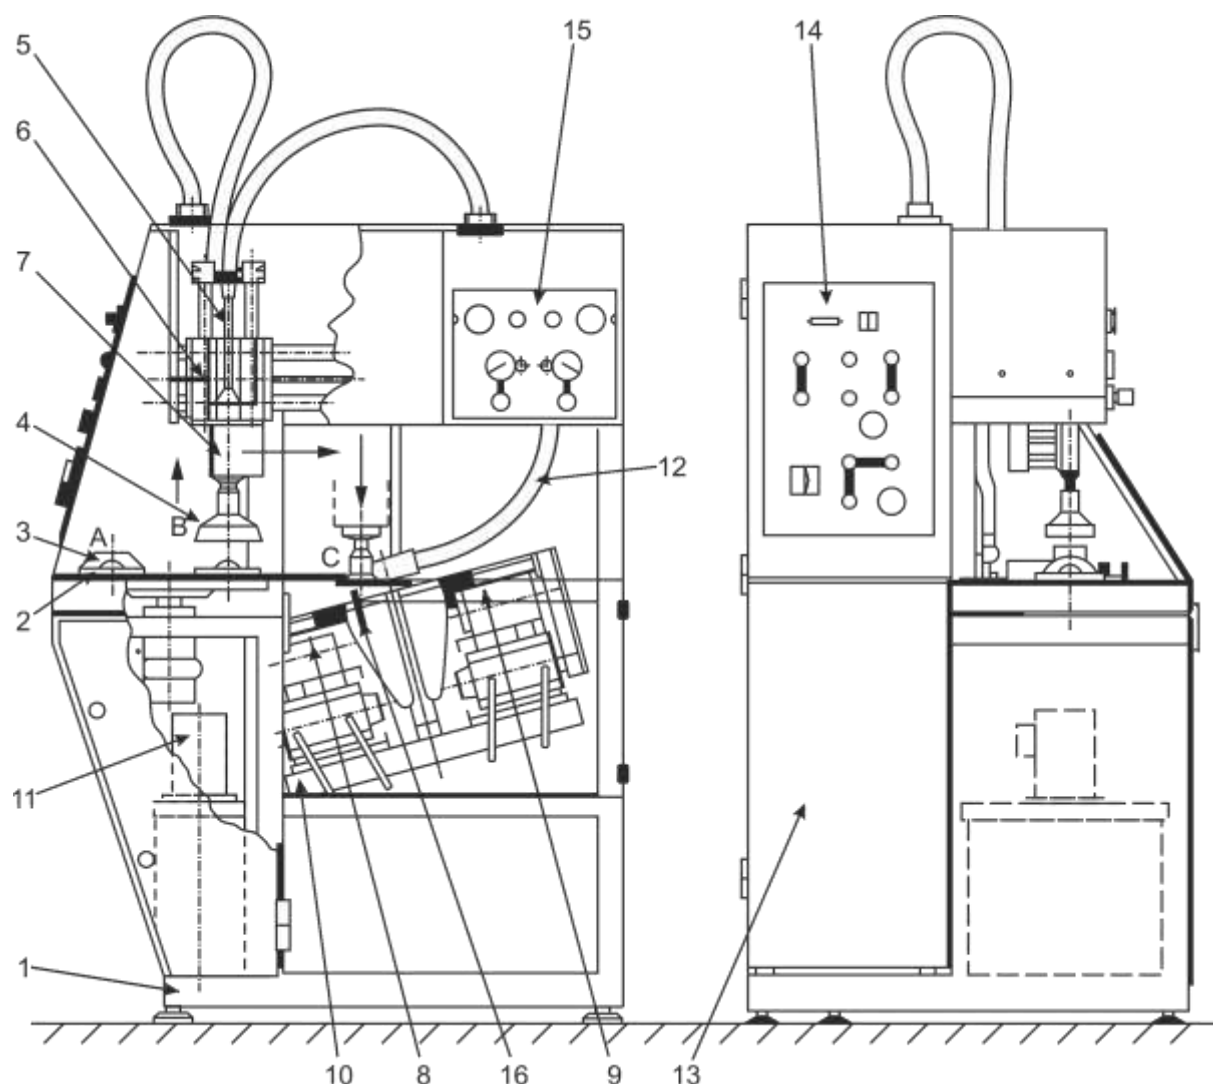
Drilling machine for chandelier bowls of VM-1 type: 1 - frame, 2 - positioner, 3 - chandelier bowl, 4 - gripper, 5 - pneumatic drive, 6 - travel between positions B and C, 7 - turning of the head by the spacing of holes, 8 - left drilling unit (spindle, feed, electric motor), 9 - right drilling unit, 10 - tilting of drilling units, 11 - cooling unit, 12 - cooling water supply to the place of drilling the hole, 13 - distributor, 14, 15 - main and side control panel, 16 - chandelier bowl in the drilling position, A - insertion position, B - transfer position, C - drilling position
